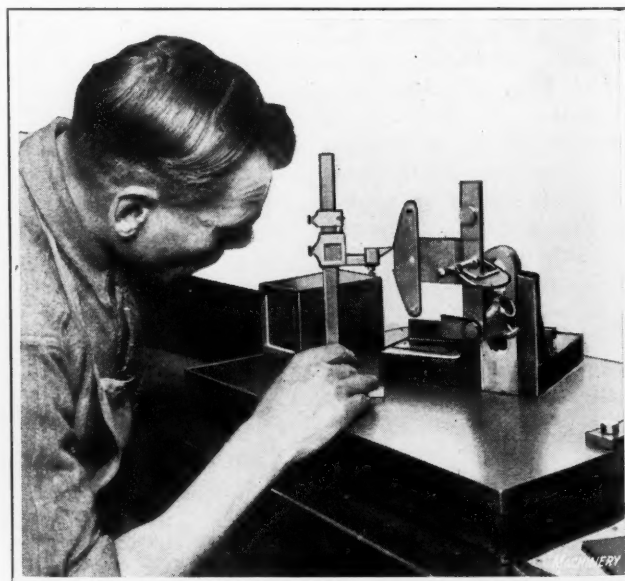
Using Height Gage to check Dimension, with Fixture resting on its Base
